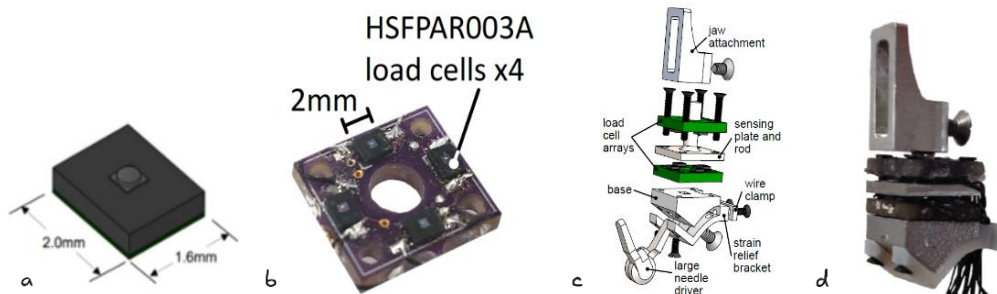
Multi-axis force sensor assembly: (a) Dimensions of the Alps Alpine HSFPAR003A force sensor ($2.0\text{mm} \times 1.6\text{mm}$); (b) PCB with four HSFPAR003A load cells mounted, necessary for multi-axis force measurement; (c) Exploded schematic view detailing the sensor components including jaw attachment, sensing plate, load cell arrays, wire clamp, and strain relief bracket; (d) Assembled prototype showing the complete sensing device.
